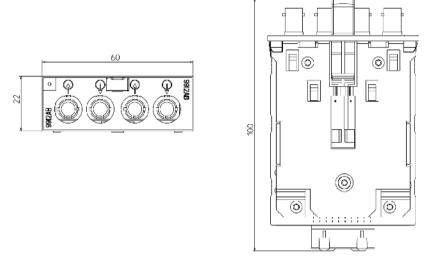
MM900 dimension drawing 3: BFOC ports
